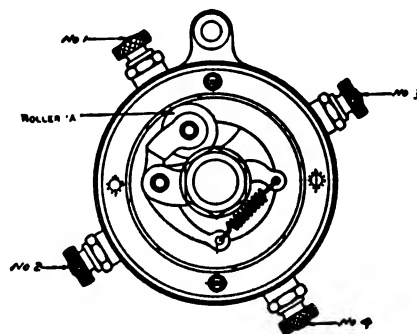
ROLLER A SHOULD BE ON CONTACT POST NO. 1 WHEN CYLINDER NO. 1 IS READY TO FIRE
